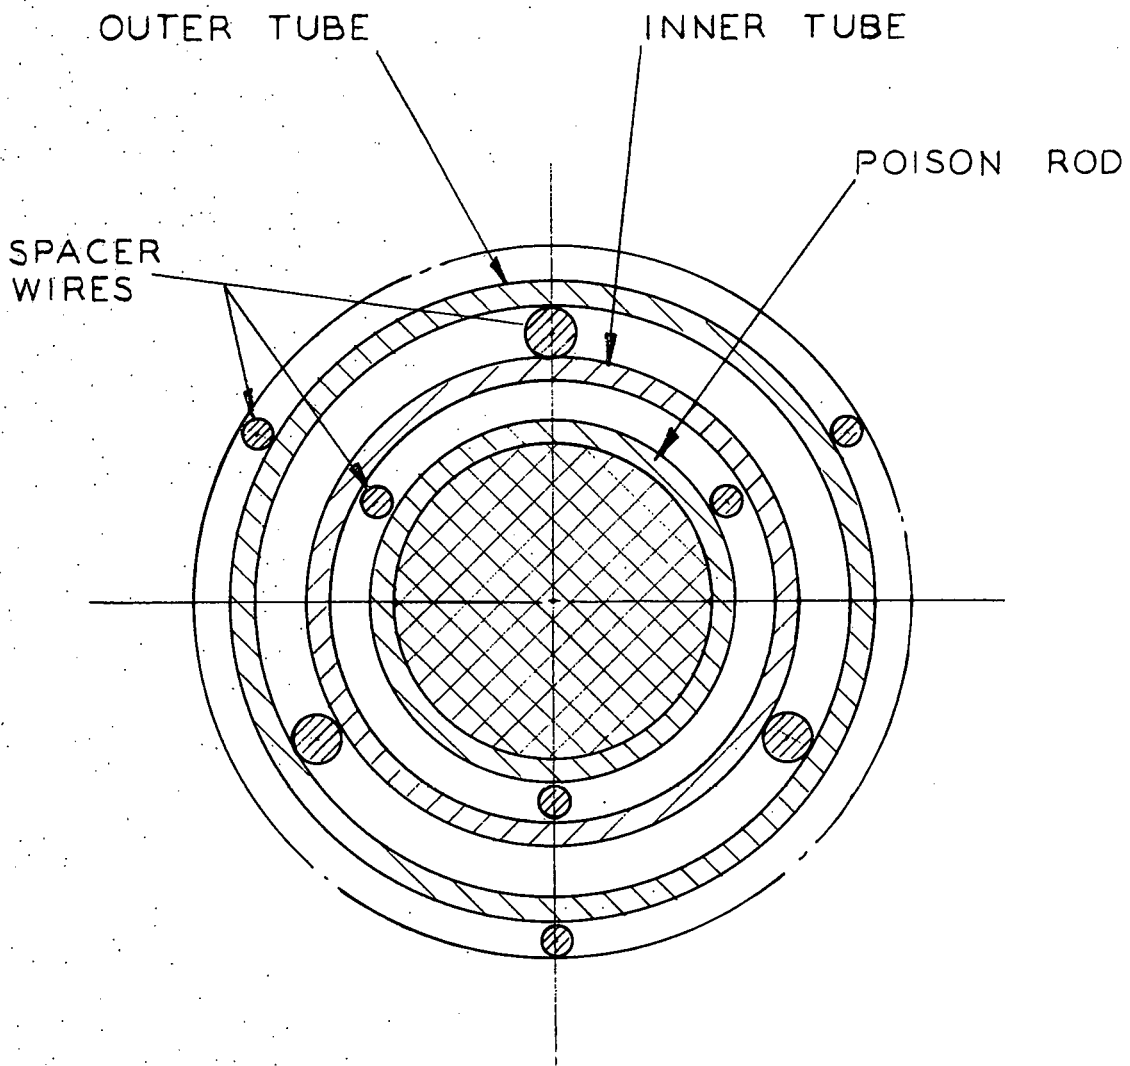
Superheater Fuel Element Cross Section (43-025-844)
